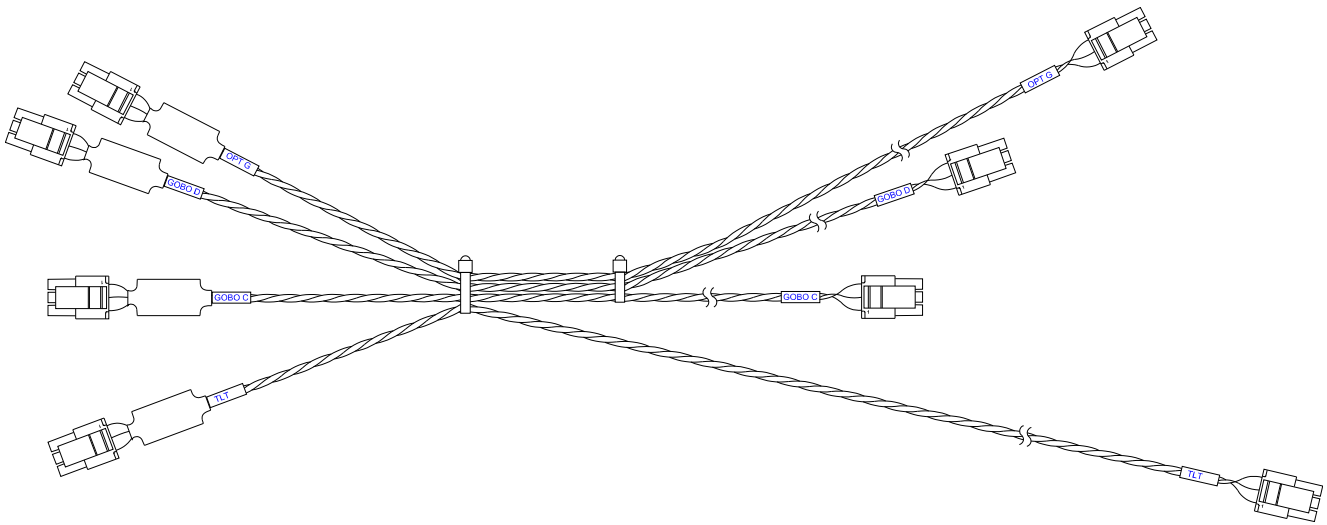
VL4000 BeamWash Power Dist Cable Assembly
